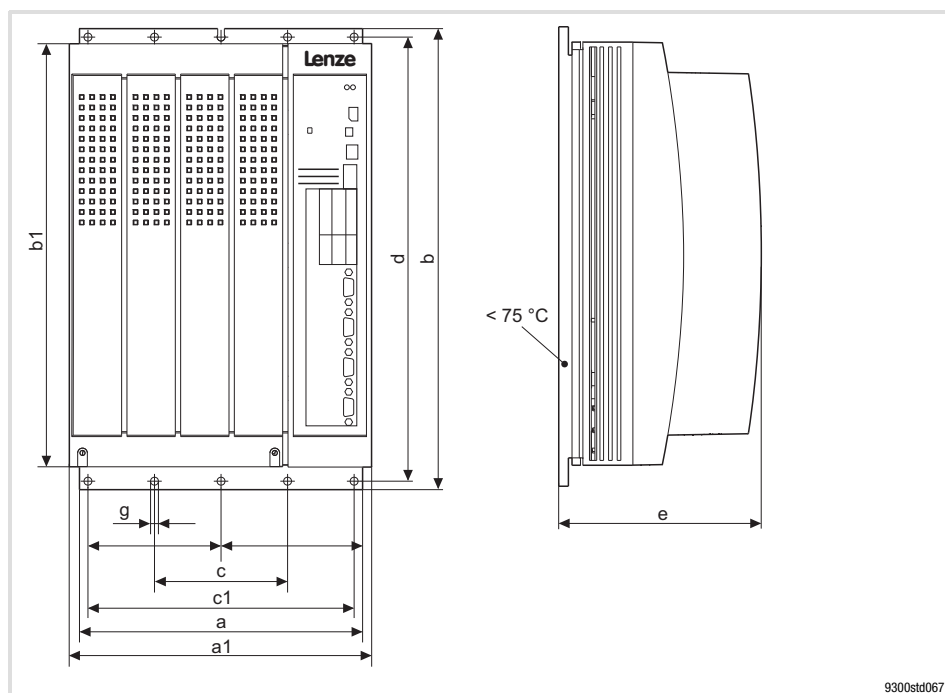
Dimensions for mounting in "cold plate" technique 15 ... 22 kW
